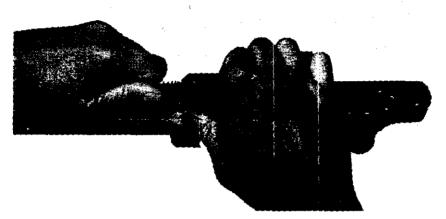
Replacing the operating rod spring and operating rod spring guide.
